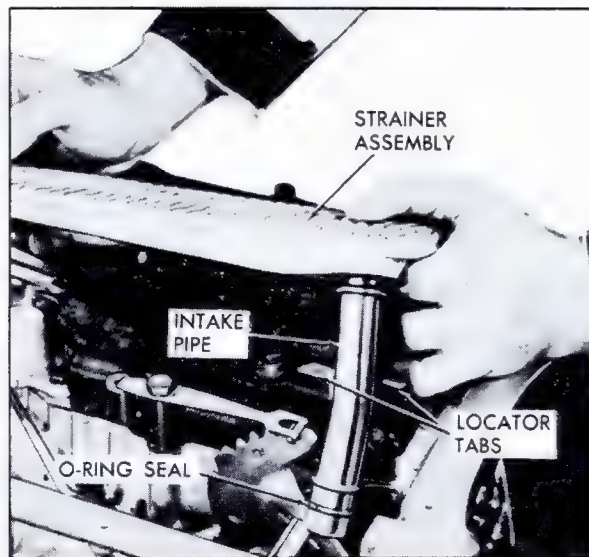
Removing Intake Pipe and Strainer Assembly
